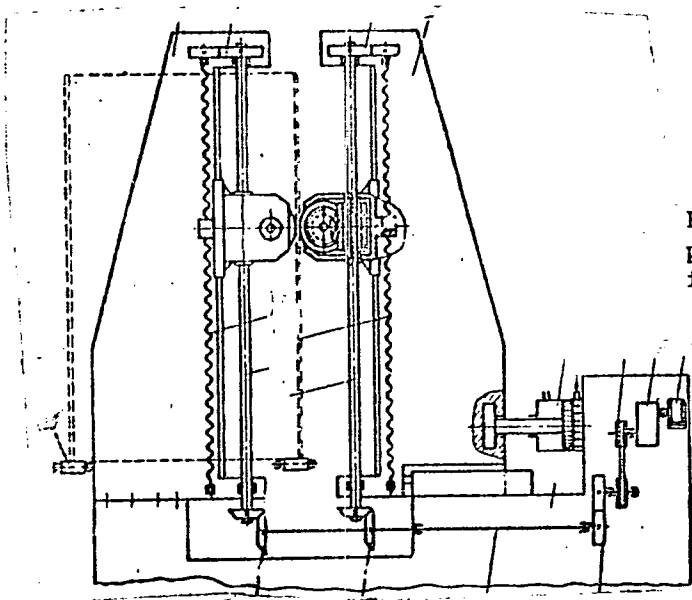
Schematic layout of a planisher for longitudinal welds in large-diameter shells.
